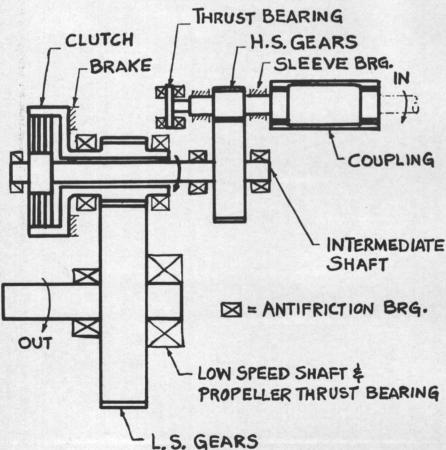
Schematic arrangement of the reduction gear, which incorporates in the assembly the clutch, brake and thrust bearings. The total dry weight is 1,915 pounds.
